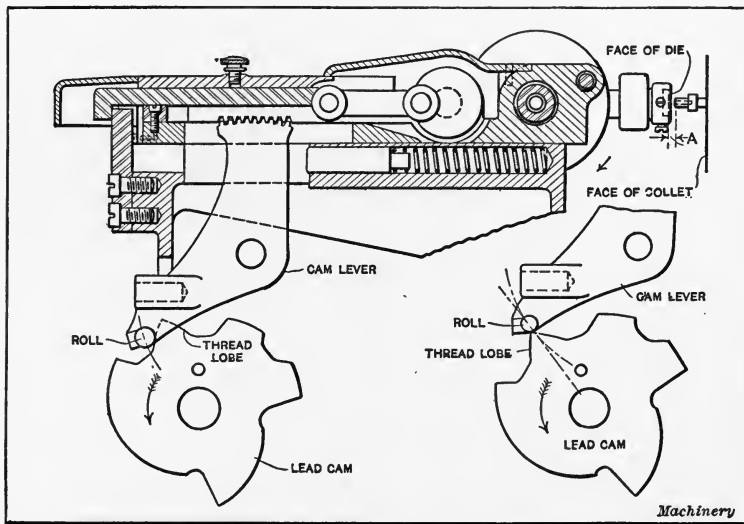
Turret-slide Operating Mechanism on Brown & Sharpe Machine
